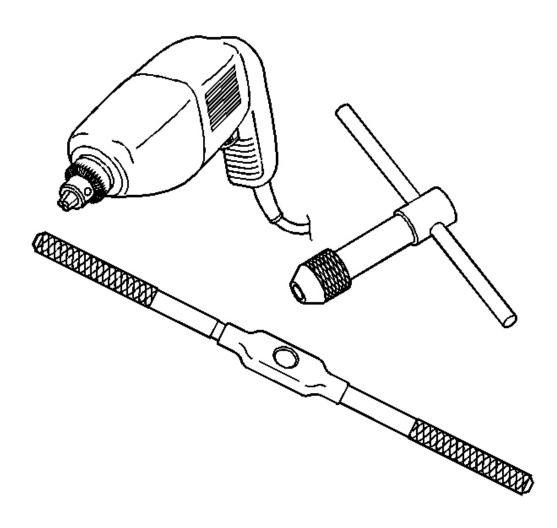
View Of J 42385-400 Tool Kit Courtesy of GENERAL MOTORS CORP.
